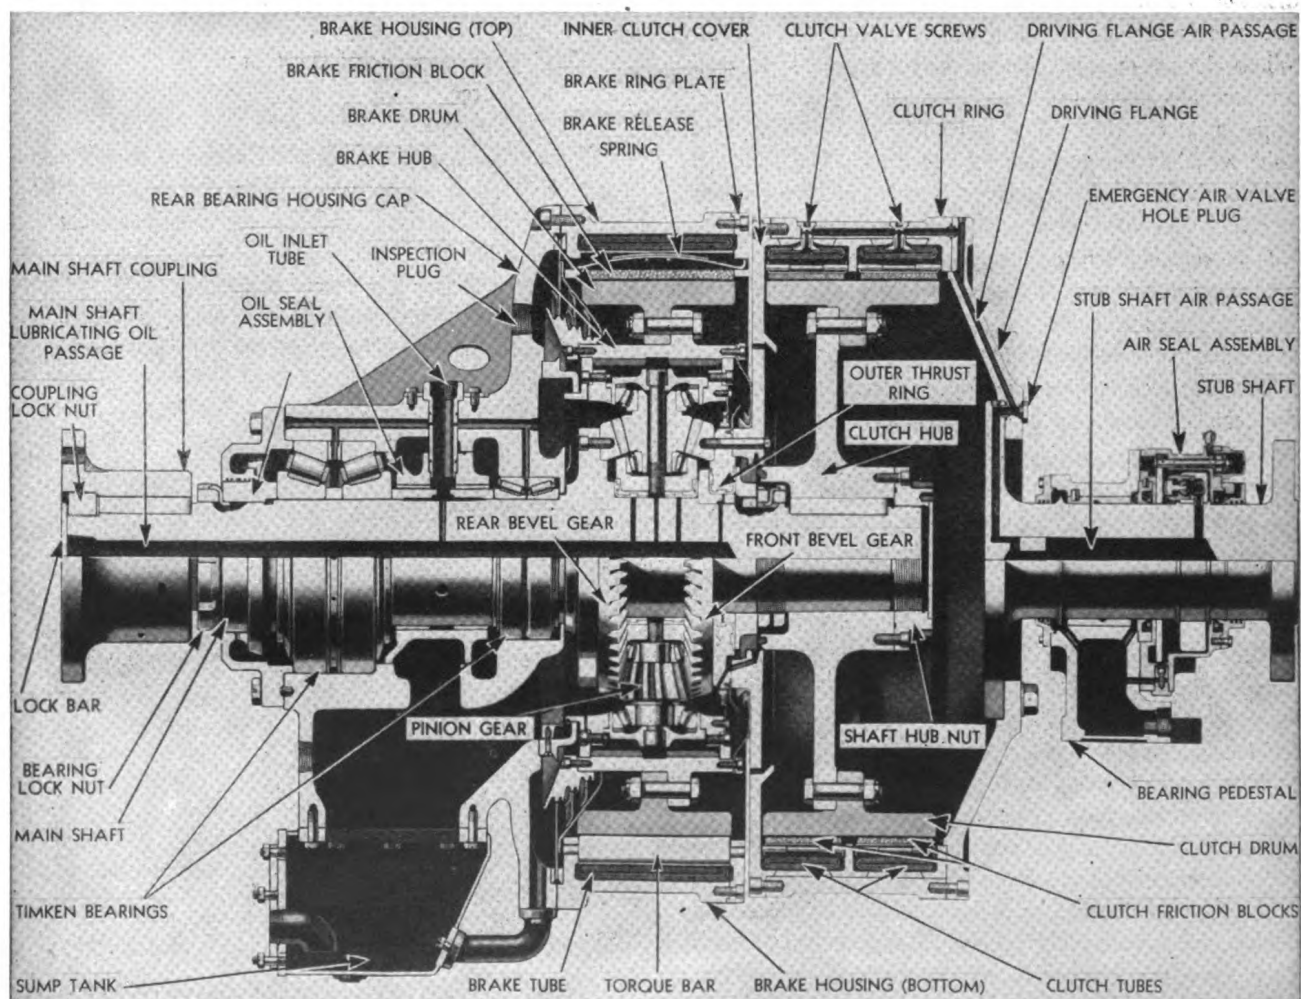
Cross section of Fawick reverse gear as used on G.M. 278 engine.
